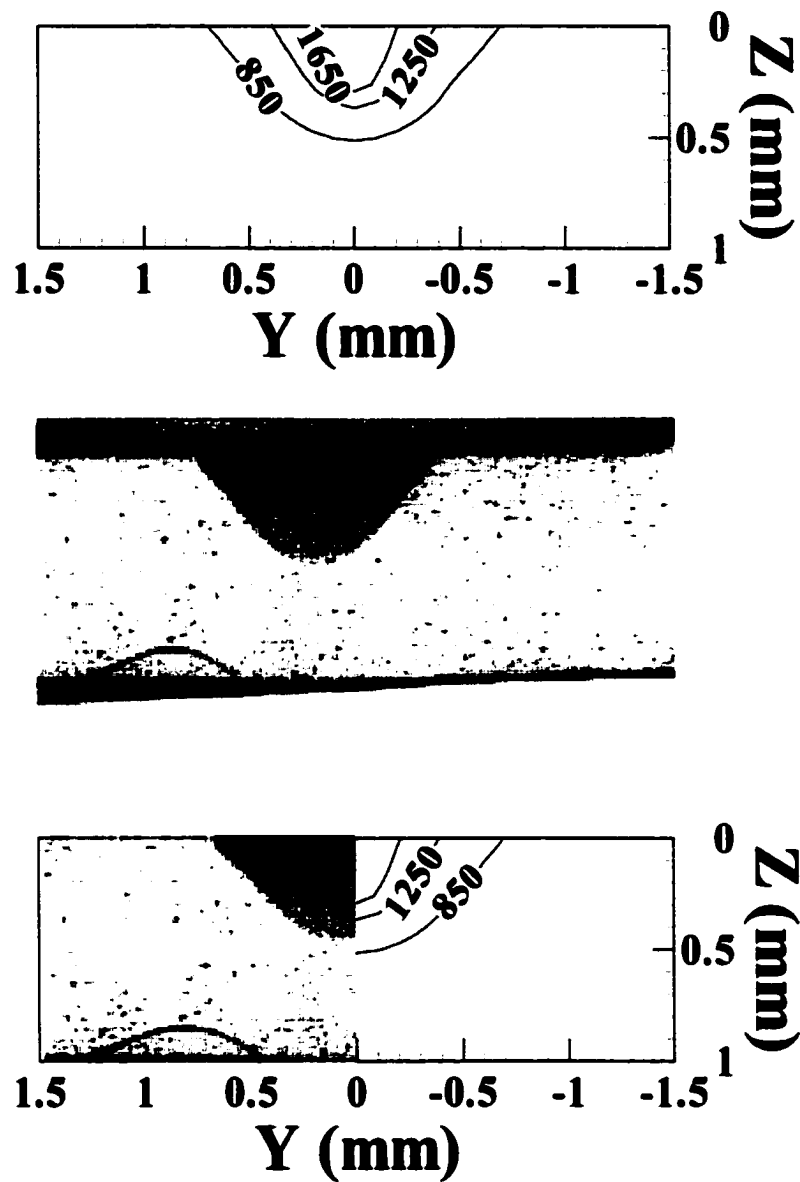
(d) Welding speed: 300 ipm
